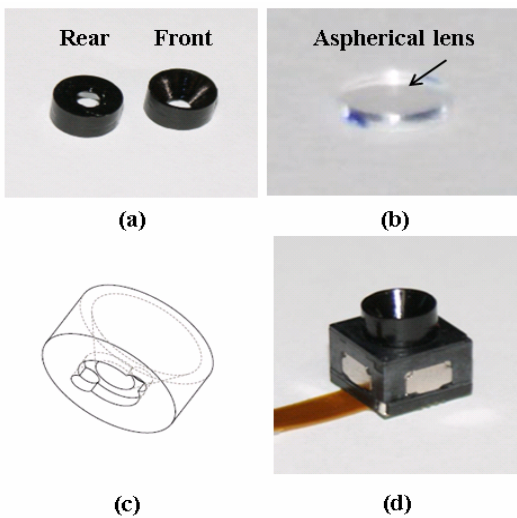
Camera module and components (a) Manufactured barrel (b) Manufactured lens (c) Barrel design (d) Assembled camera module
